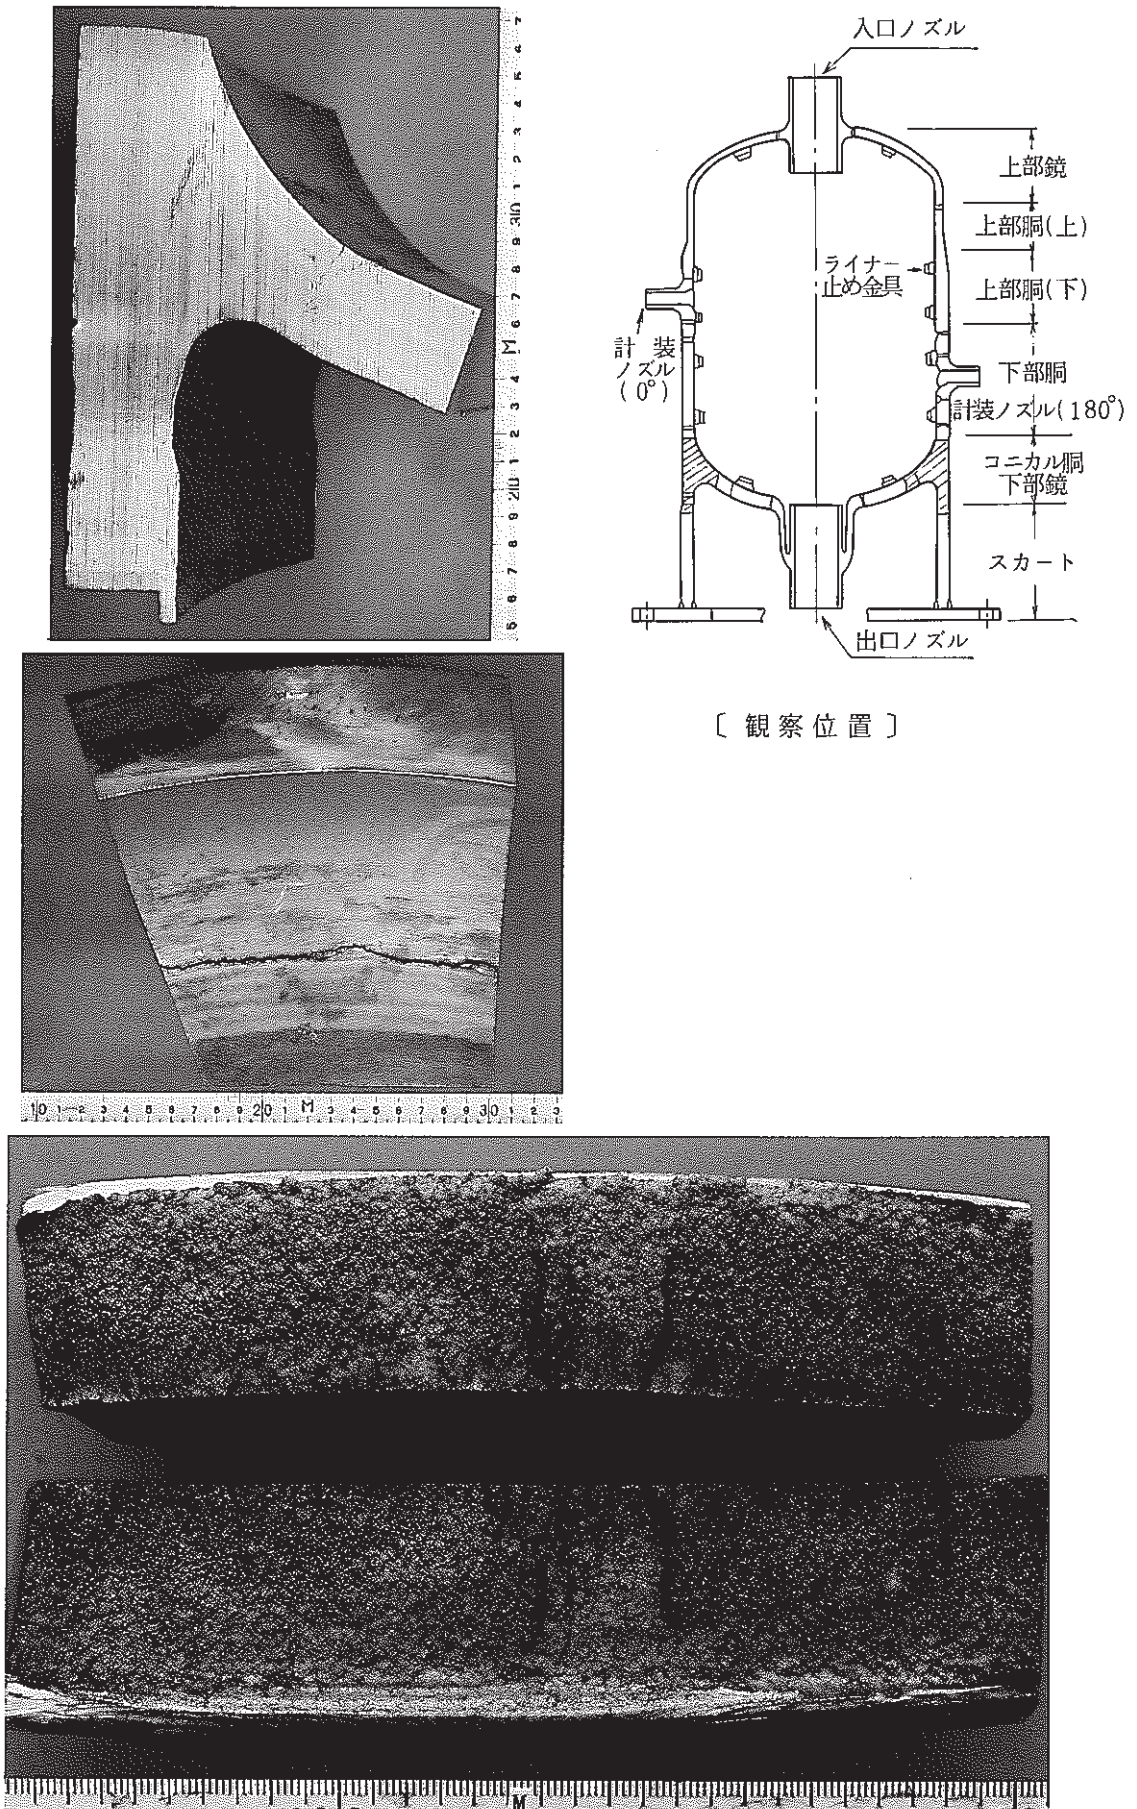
Macroscopic Profiles of Conical-Bottom Head
